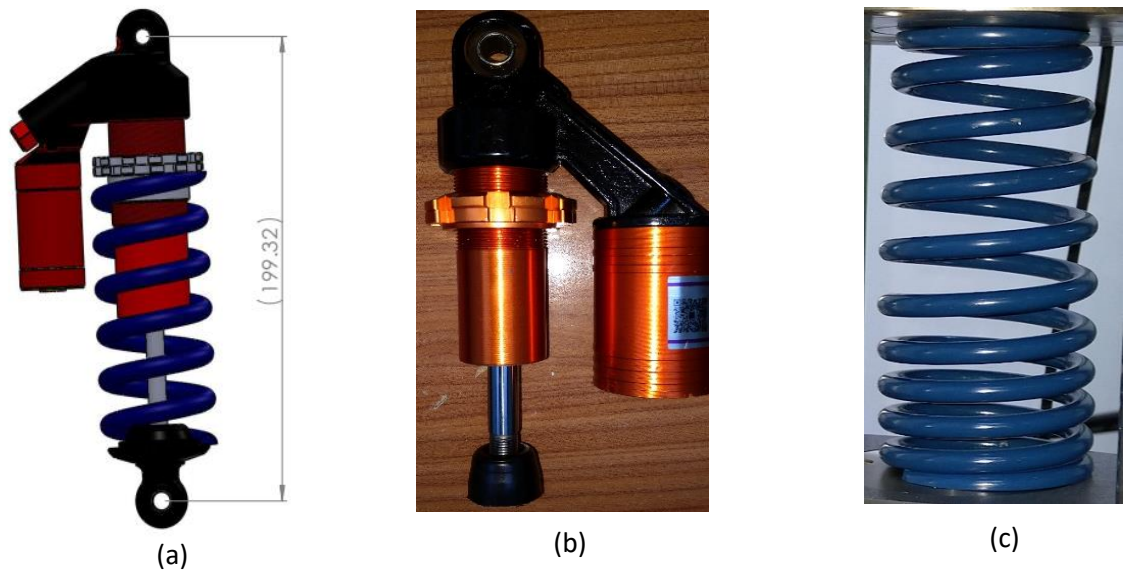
a) Sketch of damper and spring in SOLIDWORKS program b) Duplicated picture for the damper c) Duplicated picture for spring
